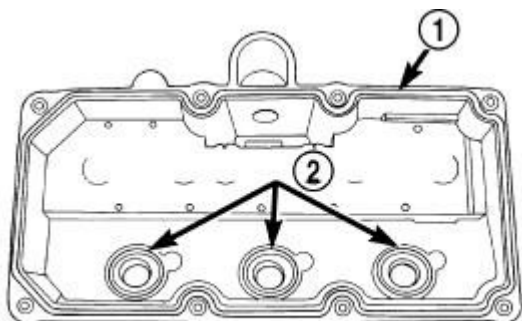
Cylinder Head Cover Gasket & Spark Plug Tube Seals
